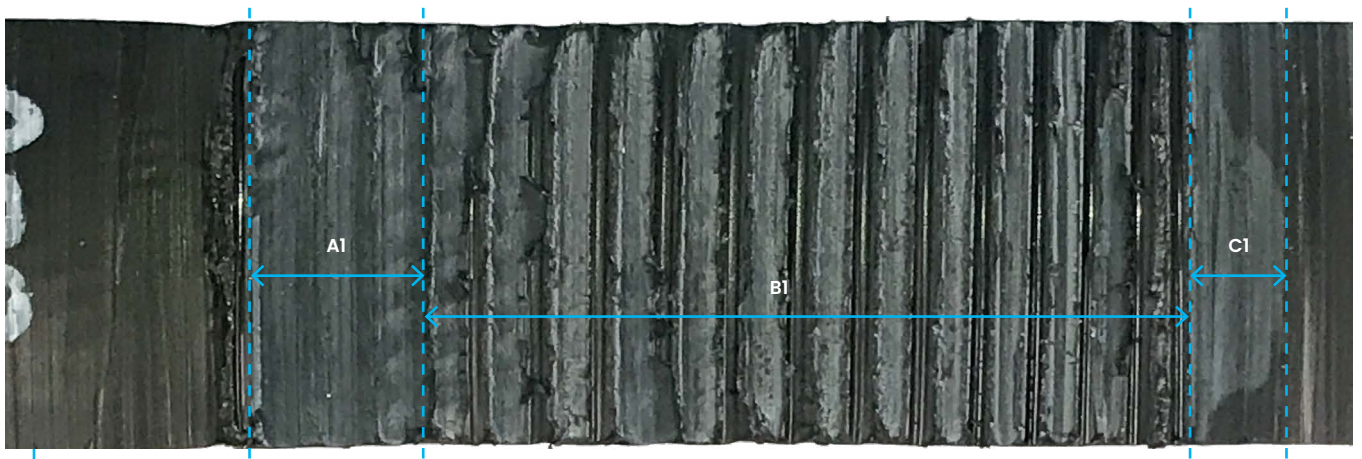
Pipe side – plan view of the full fracture zone based on the close-up image shown in Figure 12.
